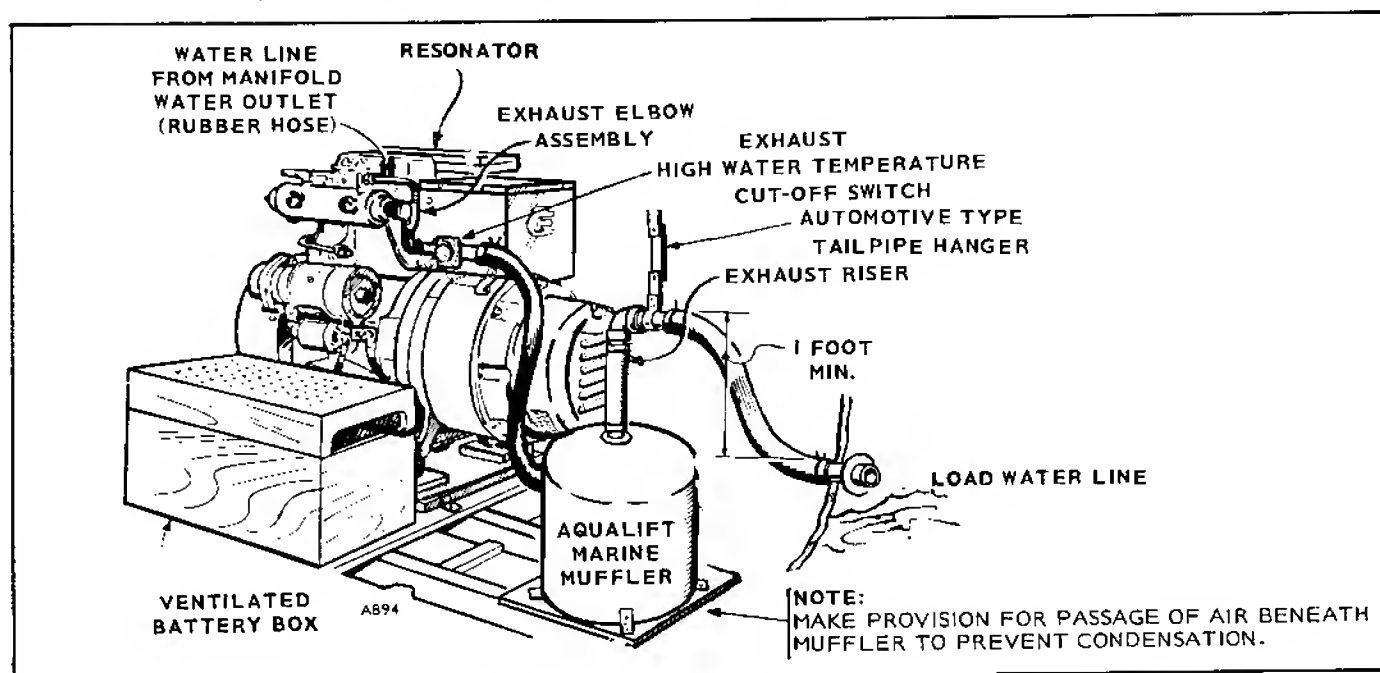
ABOVE-WATER-LINE INSTALLATION OF MDJB ELECTRIC PLANT
